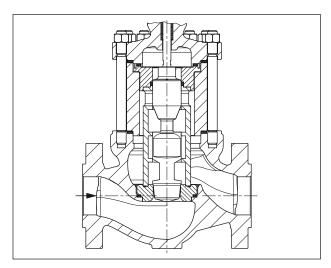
Type 261GR Globe Valve with 4-stage CDST plug
